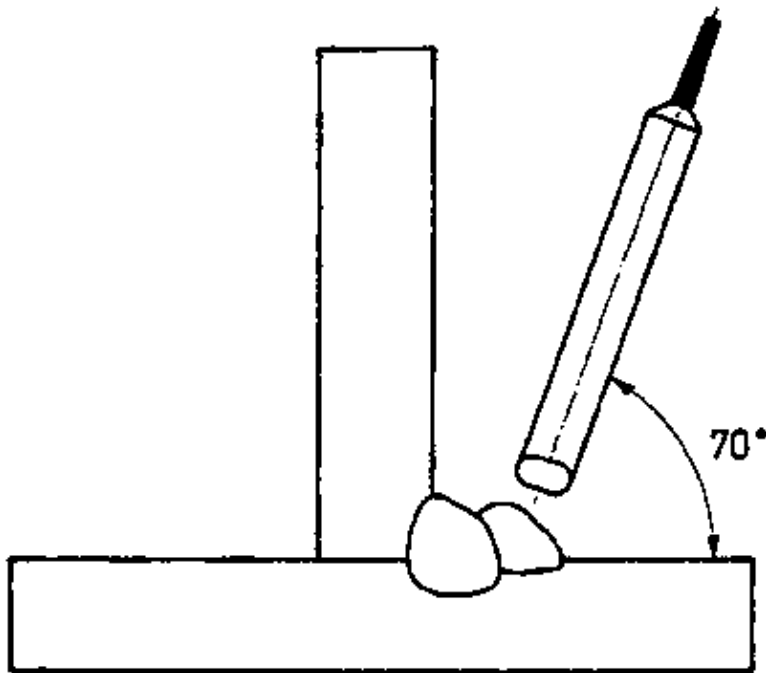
Electrode position for fillet weld, horizontal, second pass
